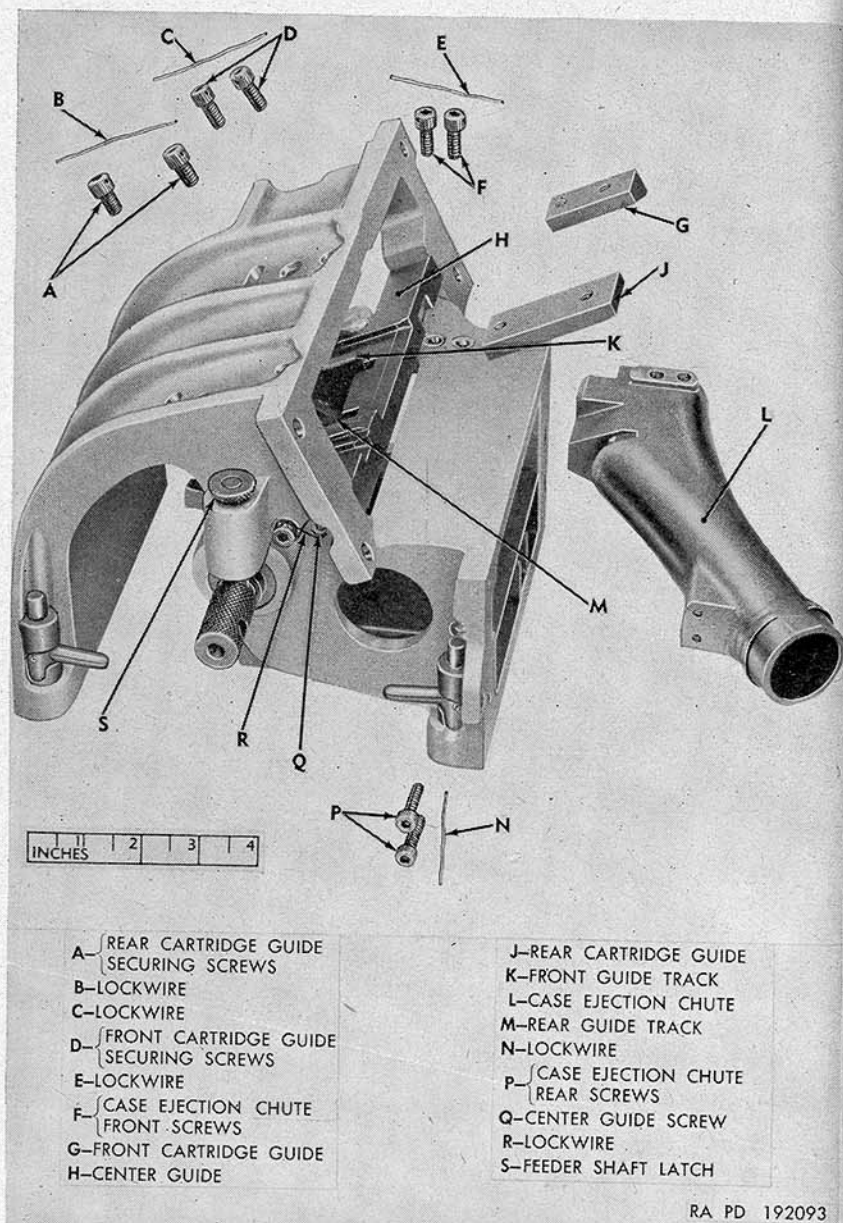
Cartridge guides and case ejection chute removed from a right-hand feeder assembly.
